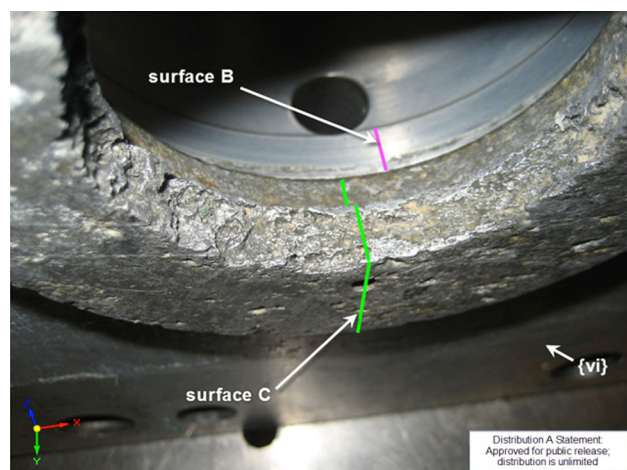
Close-up photo of seawater corrosion damage on the outboard portion and sealing surfaces on the valve actuator's internal bore
